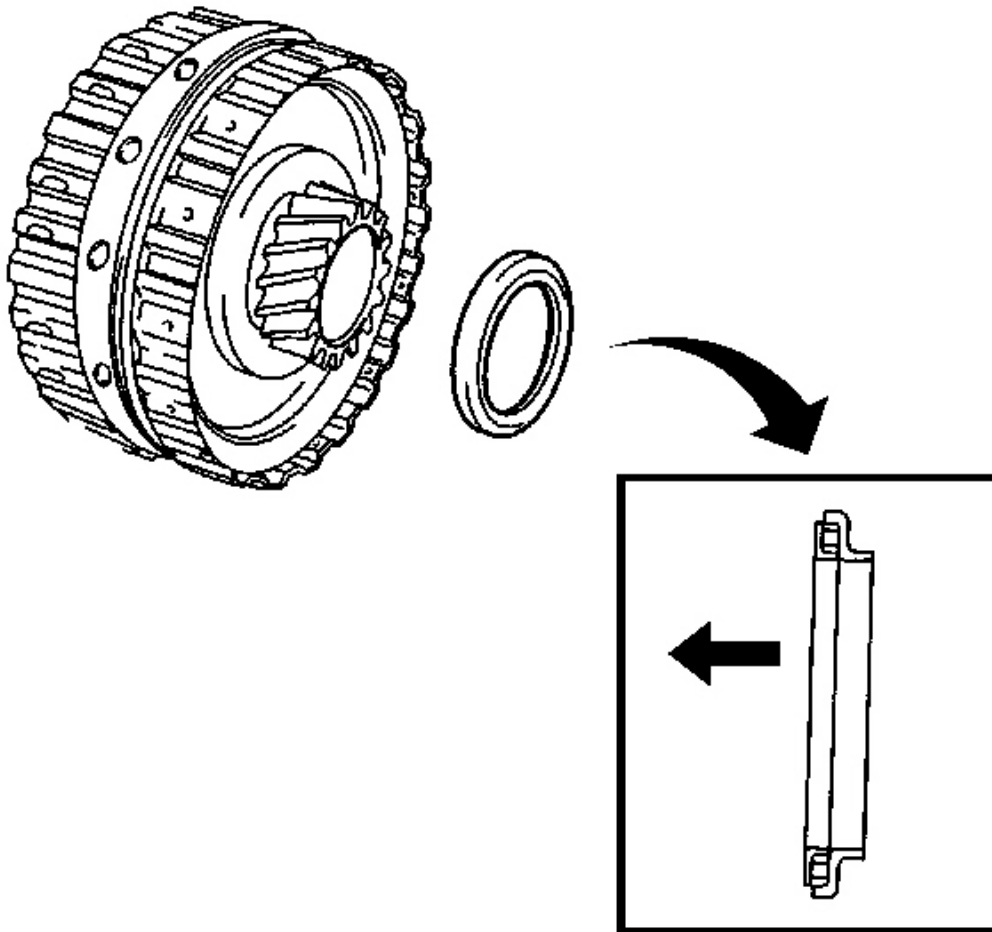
Thrust Bearing Race & Rear Planetary Sun Gear
